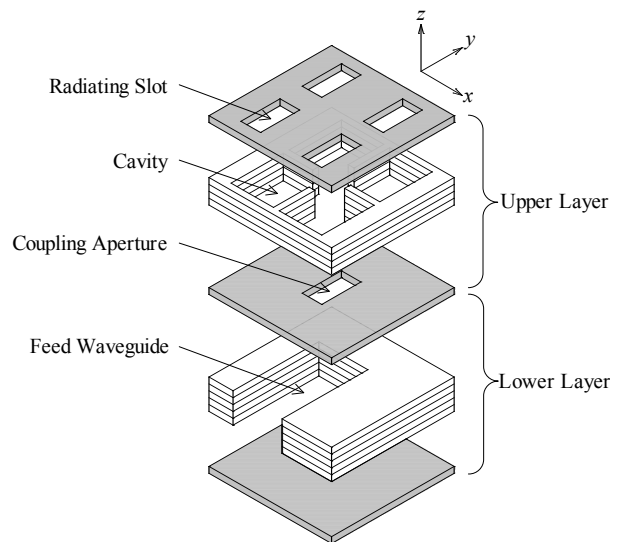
Exploded perspective view of the  $2 \times 2$ -element subarray
